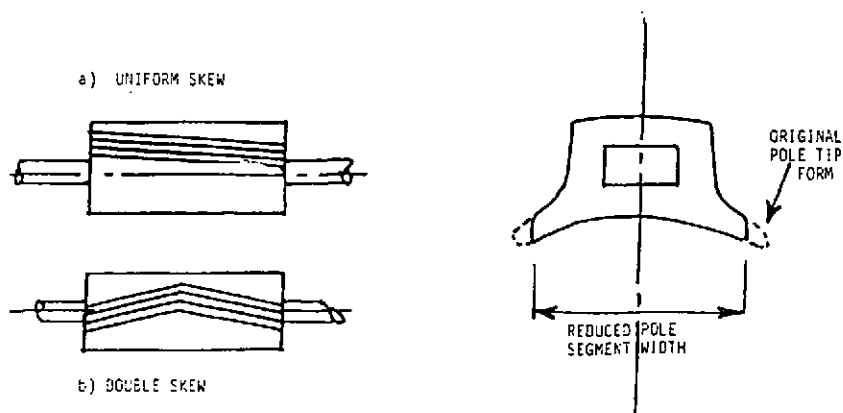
SKETCHED ILLUSTRATING ROTOR SLOT SKEWING AND POLE TIP MODIFICATIONS FOR DC MACHINES.
